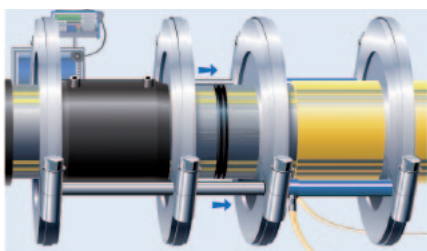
Cooling the butt weld joint under joining pressure
